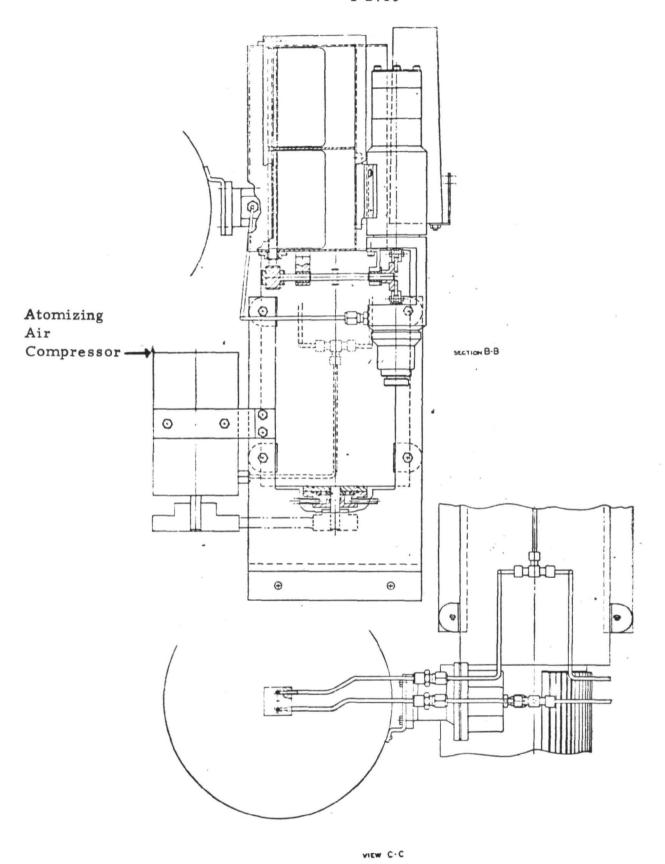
51 Views of Layout Drawing of Figure 5. 48 Illustrating Position of Fuel/Air Control.
